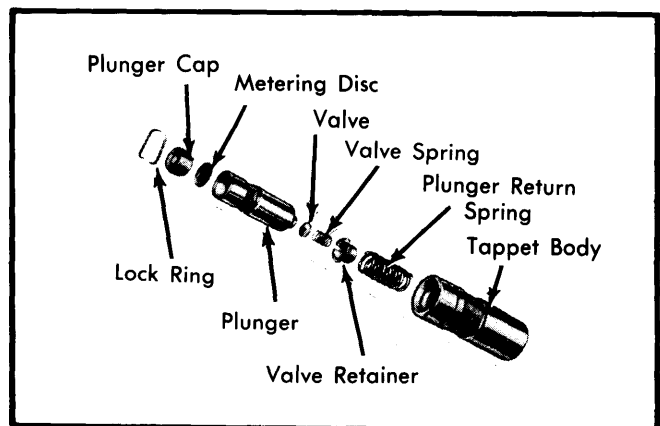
Exploded View of Hydraulic Lifter Assembly
